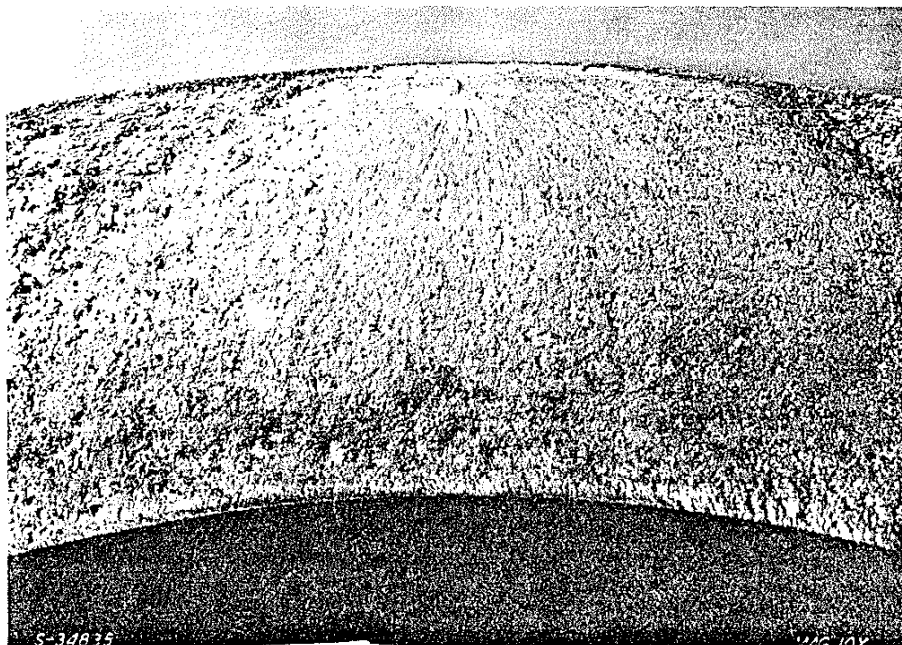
Fracture Surface of Special Shaft of AISI 4350 at Rockwell C-38. Outer Surface Cold Rolled in Final Processing.
